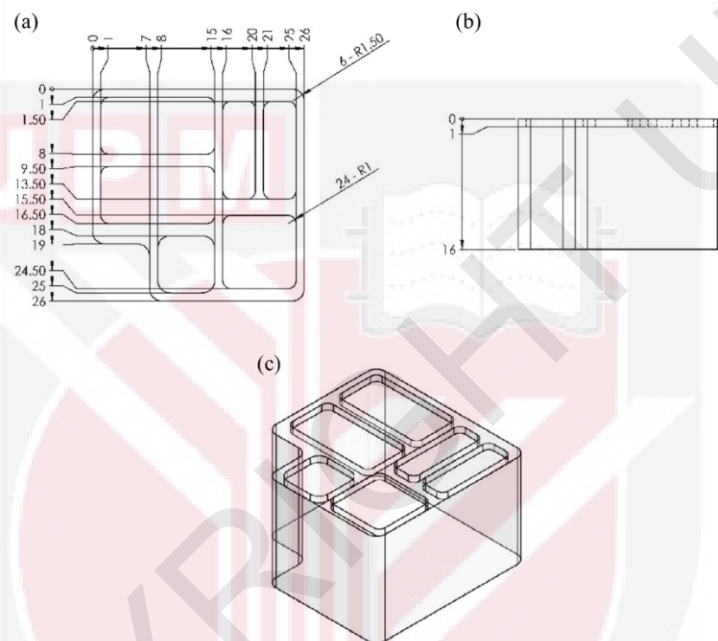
Dosimeter holder (D1) design: (a) Top view, (b) side view, (c) orthographic view
